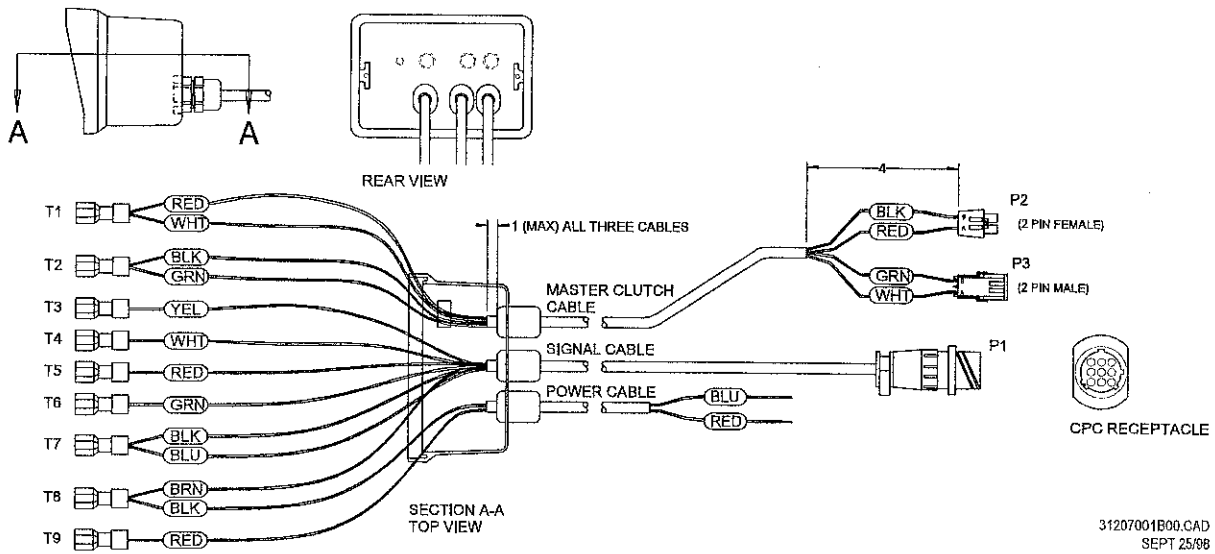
Multiclutch Switch Box - Case/Cable Assembly
